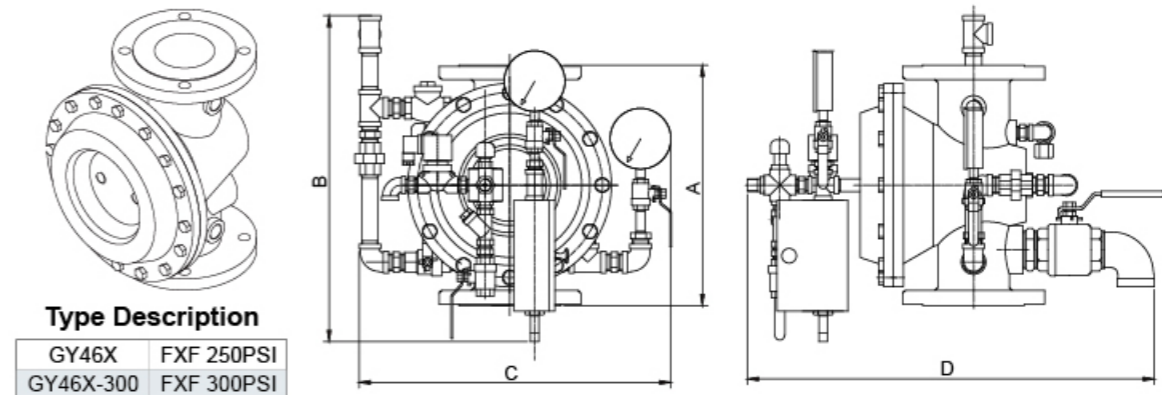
Outline dimensional drawing of deluge alarm valve (Grooved \* Flange connection)
